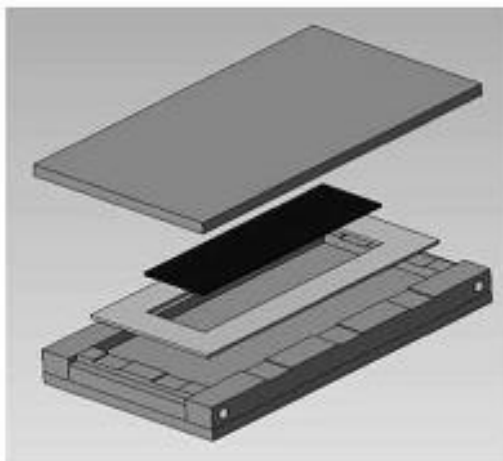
Mould for bulk specimens. Expanded view with steel plates and silicone rubber frame [13].
